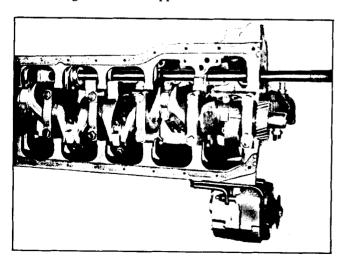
Procedure for Removing and Installing Camshaft Bearings, L-6 and V-8
